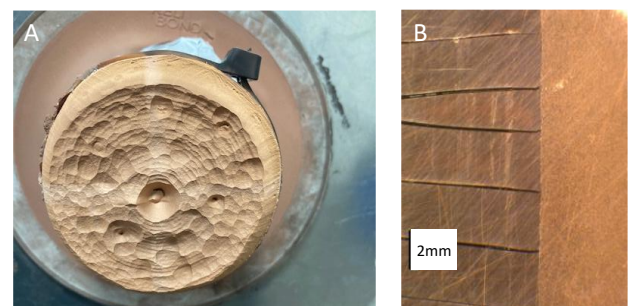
Cu based CS contact layer applied on a 2500mm² Milliken Cu conductor with enamelled wires A) Frontal view B) Section view.
